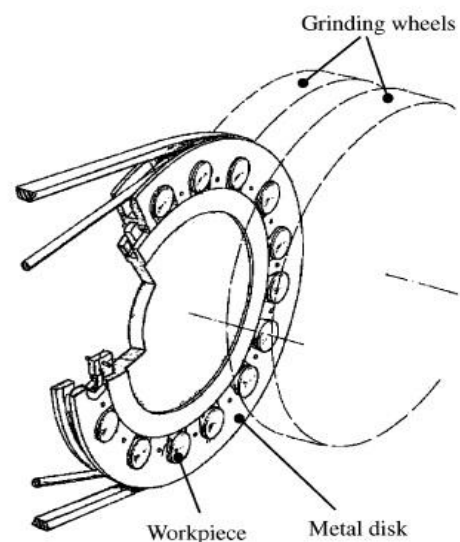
SDSG machine configuration for metal work pieces in disk shape
